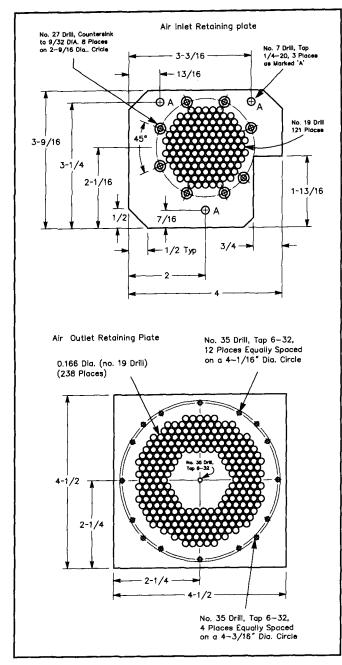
Air inlet retaining plate (top) and air outlet retaining plate (bottom). If you use a blower other than the unit specified in the parts list, you may have to modify the hole locations and sizes shown on the drawing. Make the plates from 0.125- to 0.250-in. aluminum.
